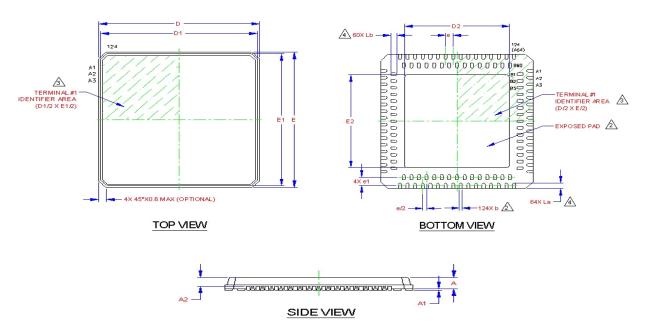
USB2227/USB2228 124-Pin DQFN Package Outline
